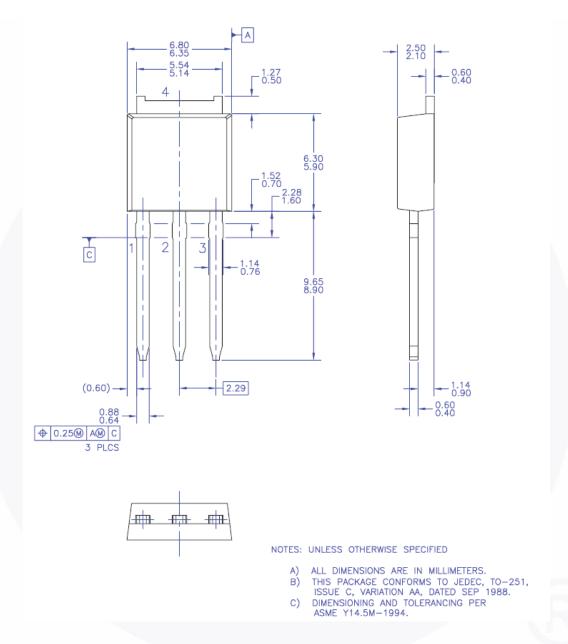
TO-251 (I-PAK), Molded, 3-Lead, Option AA
